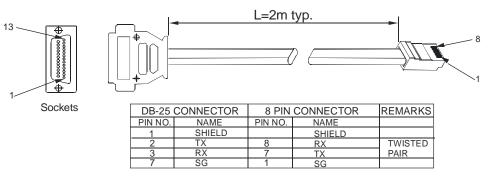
RS232 cable with DB25 connector (P/N: GEN/232-25)
